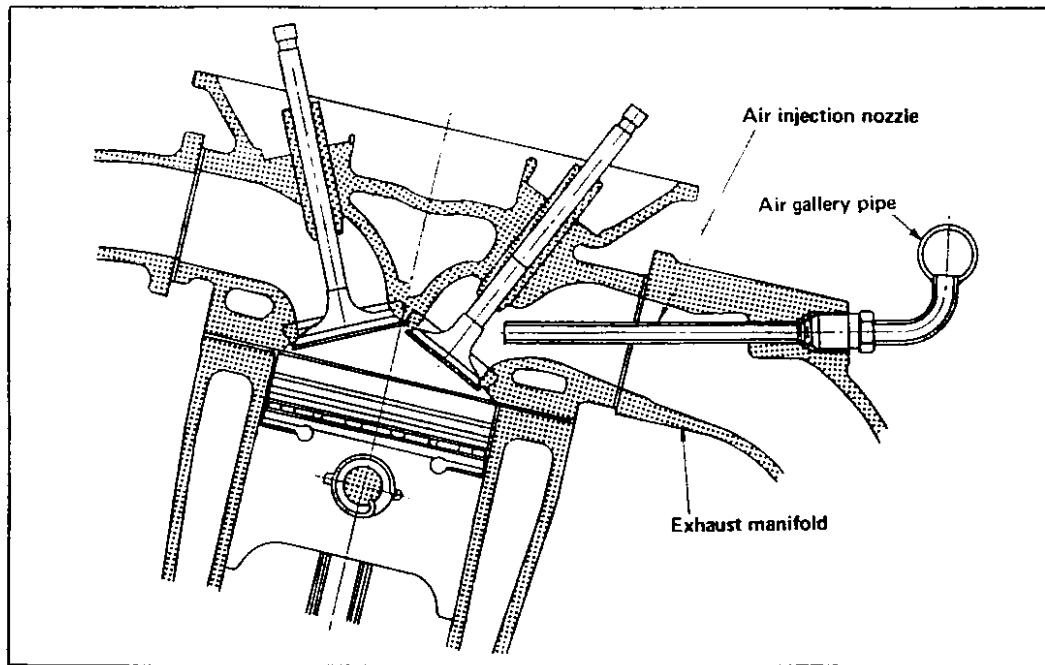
Sectional view of air injection nozzle and exhaust port
